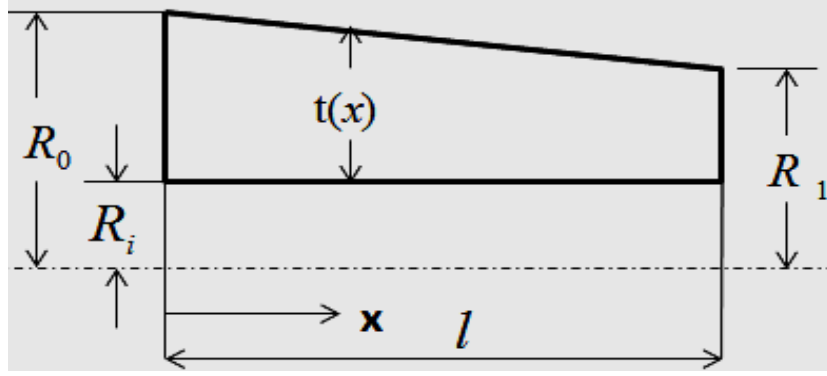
Hollow tapered shaft finite element with uniform bore.
